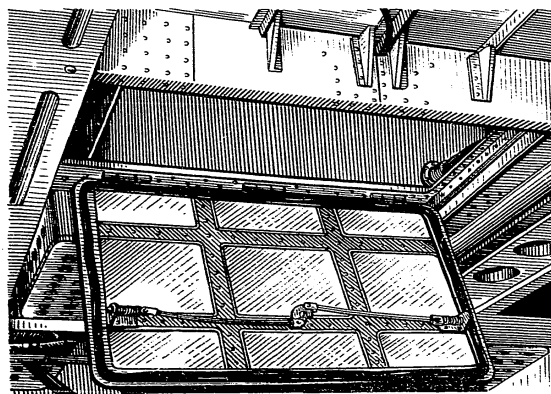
HATCH FOR INSPECTION OF GEAR BOX COMPARTMENT
